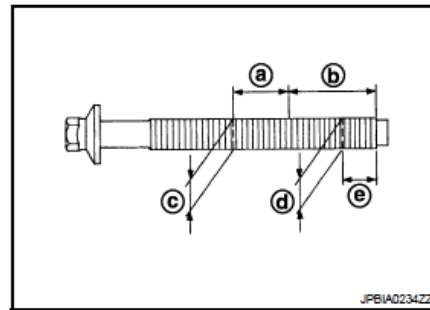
Identifying Lower Cylinder Block Bolt Outer Diameter
